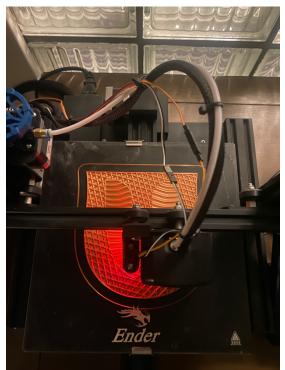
3D Printing Mold Pieces (Rehm, 2023)
